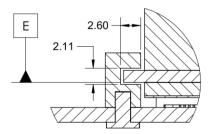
SFF Baseboard Chassis CTF Dimensions (Rail Guide Detail) – Detail C
